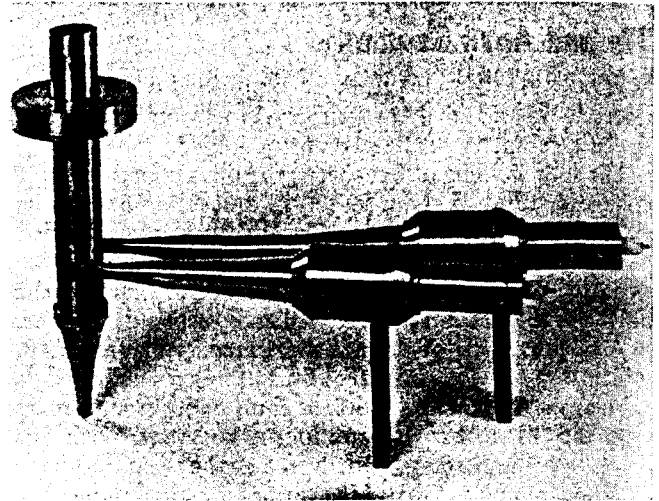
Transducer-Sonotrode System for Ring Welding Machines
